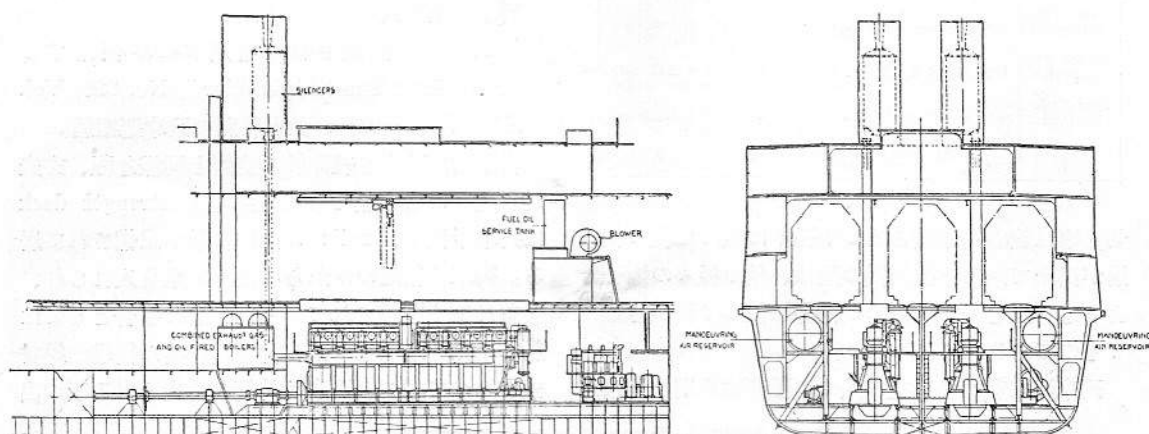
Machinery Arrangement of the Twin-screw Motor Ferry "Korsor."
